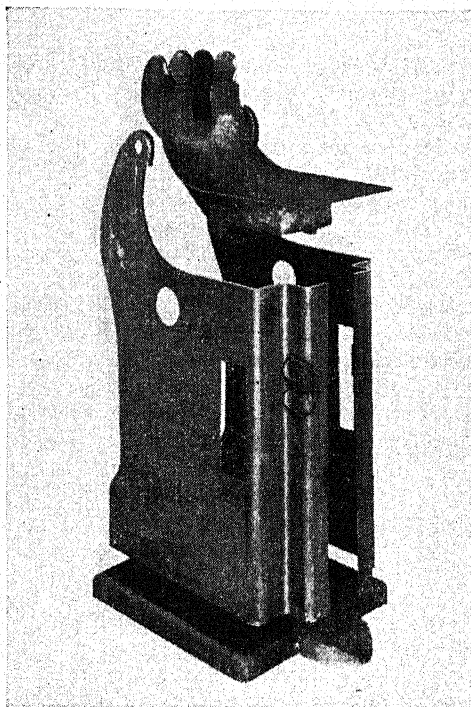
New arc welded steel frame of pressing machine.
